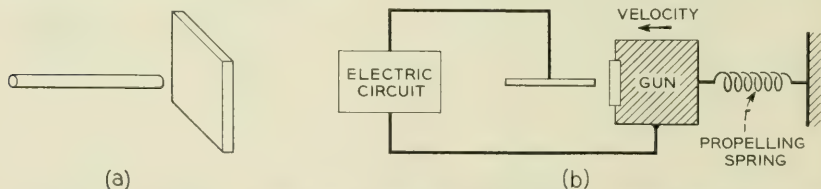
(a) and (b) Percussive welding. (a) Parts to be welded. (b) Process diagram.
